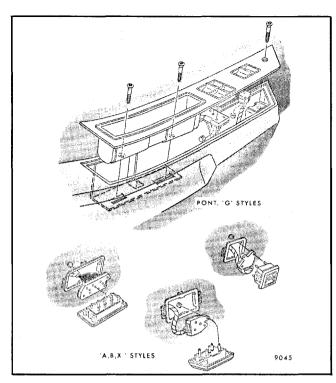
Armrest Switch Plate and Power Switch Attachment - A B, G and X Styles
